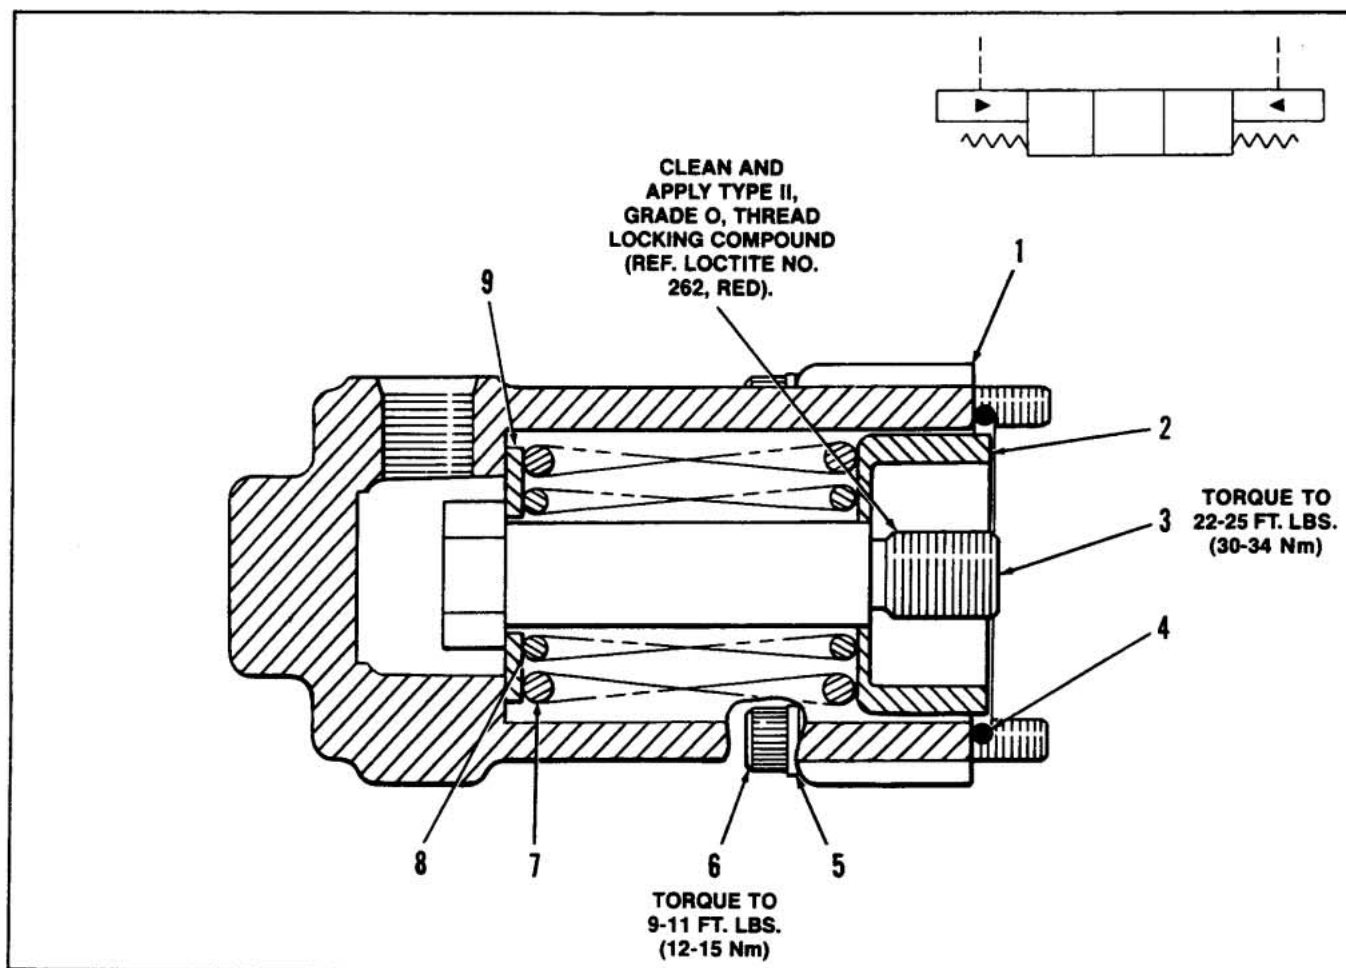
Hydraulic Remote Positioner ("B" Port End)
